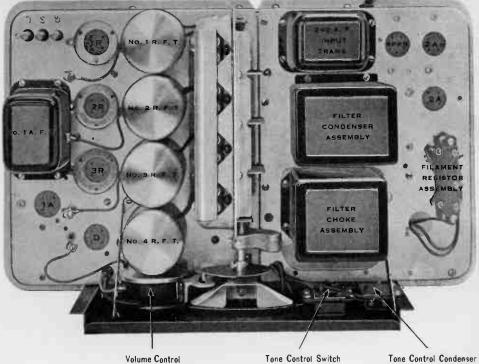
TOP VIEW OF TYPE D CHASSIS.
